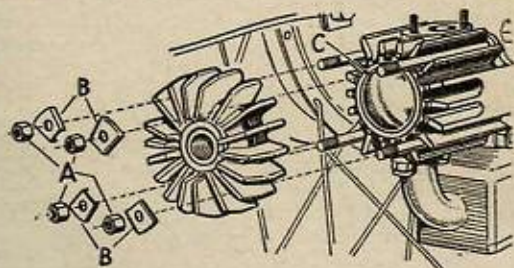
Cylinder head removed with the piston at T.D.C. The saddle washers, B, must be placed beneath the nuts, A.
